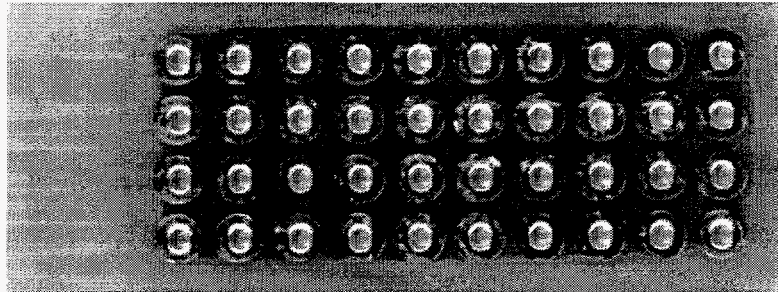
Forty hole plated-through-hole solder float test coupon used to evaluate ROSA process.
